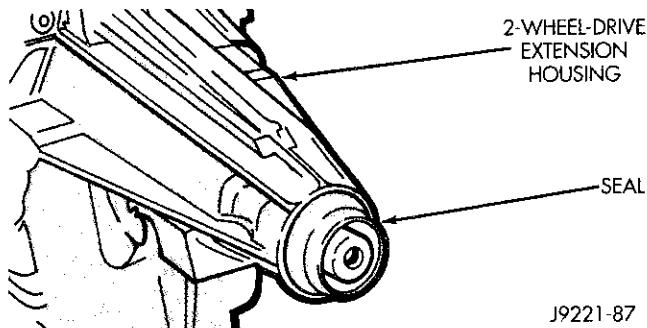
Extension Housing And Seal (2-Wheel Drive Models)
